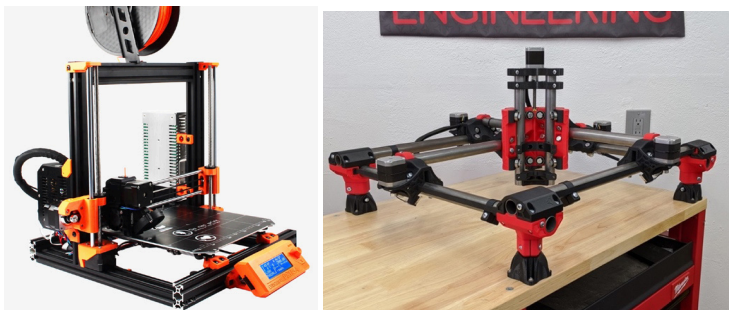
Product 1 the Prusa 3D printer with parts printed in orange (left) and Product 2 the MPCNC milling machine with parts printed in black and red (right).
